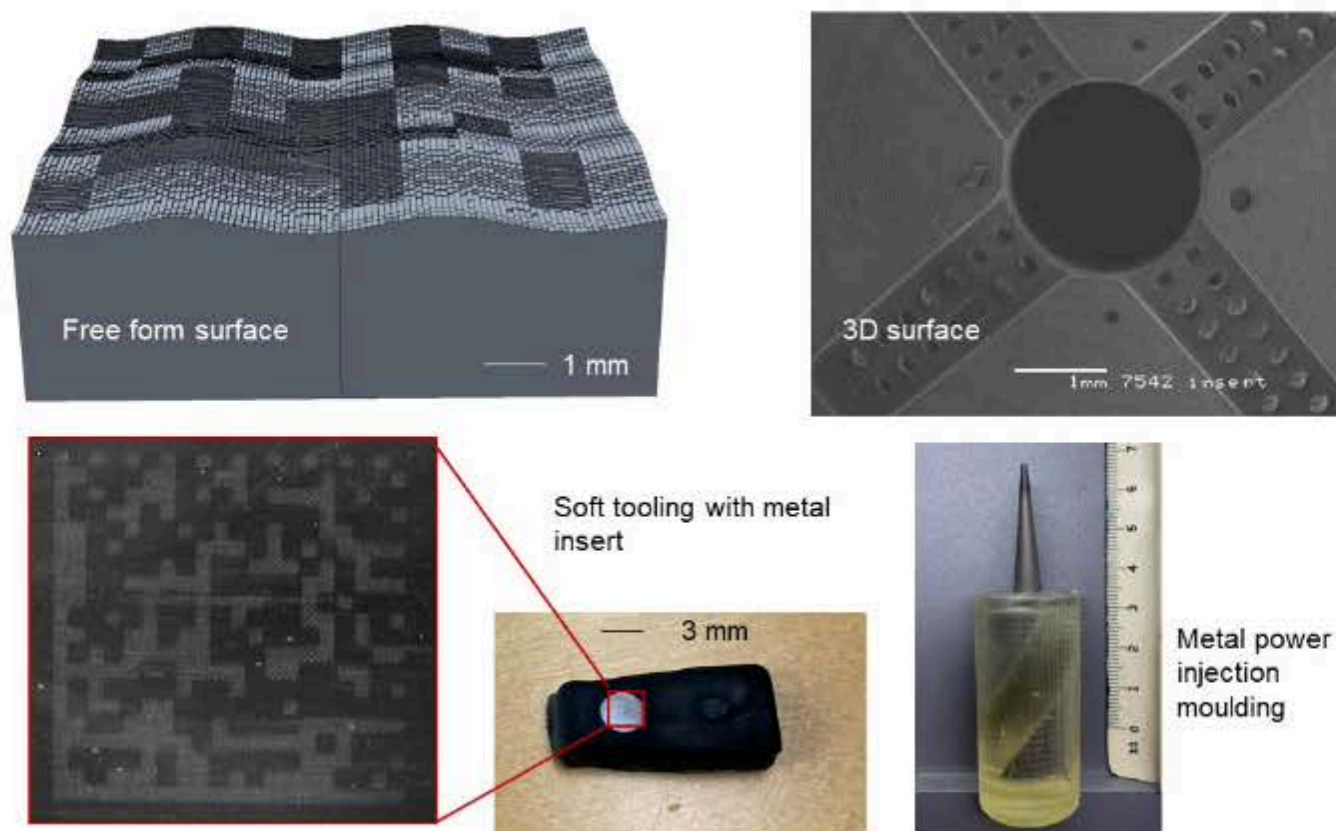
Micro structured surfaces fabricated by soft tooling injection moulding
